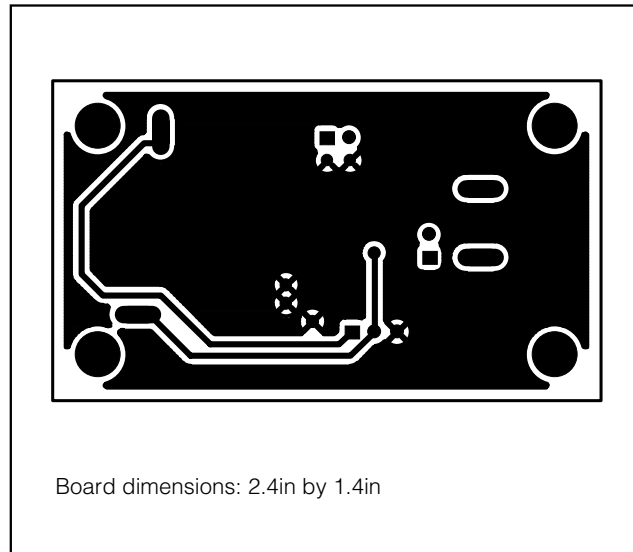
MAX889S EV Kit PC Board Layout—Solder Side
